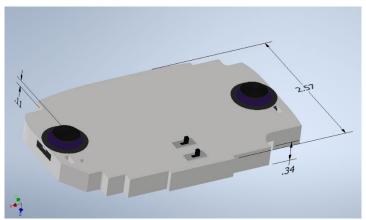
Designated Remote Controller Concept 3D Model PCB Clearance Test
